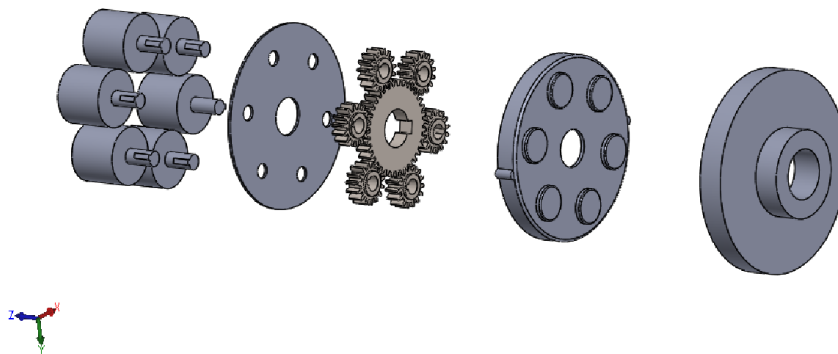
Spiral Mechanism of the Wheel Holding Assembly to Adjust for Different Wheel Diameters
